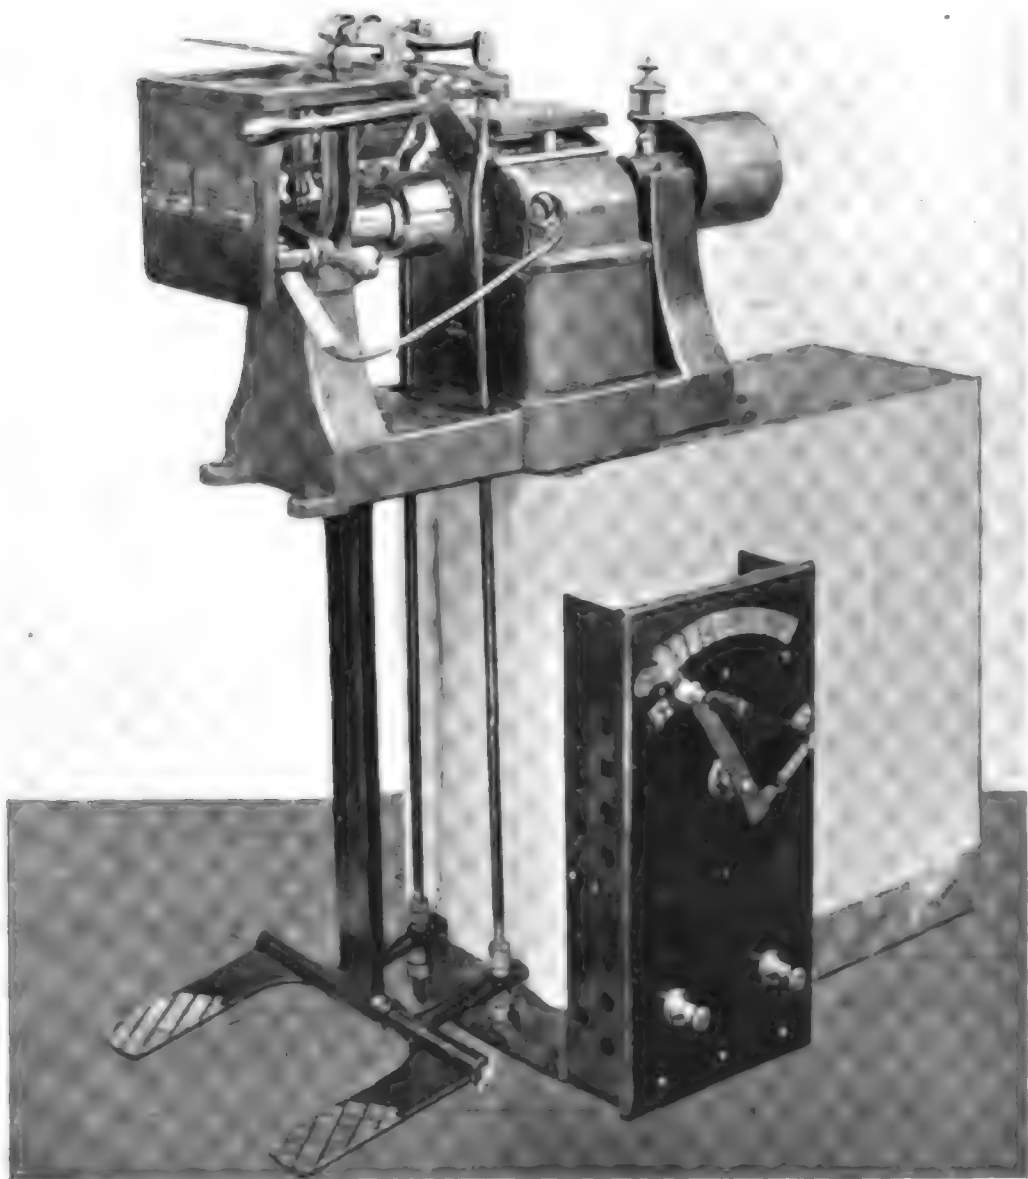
ELECTRIC WELDER FOR GENERAL WORK.
